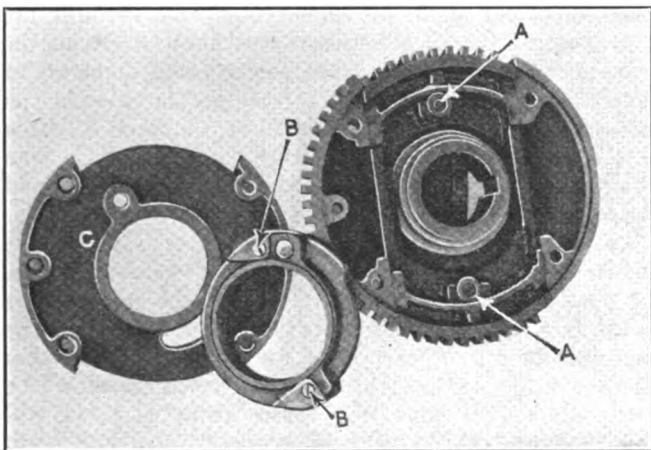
THE GEAR PARTLY DISASSEMBLED
